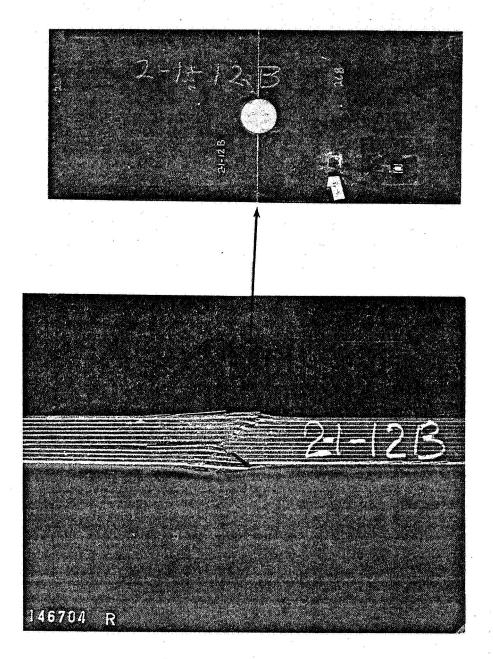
Typical Failure of 1" Diameter Notched Compression Specimen. In Top View Failure Is Across the Width Through the Hole. The Bottom View is a Close-Up of the Specimen Edge.
